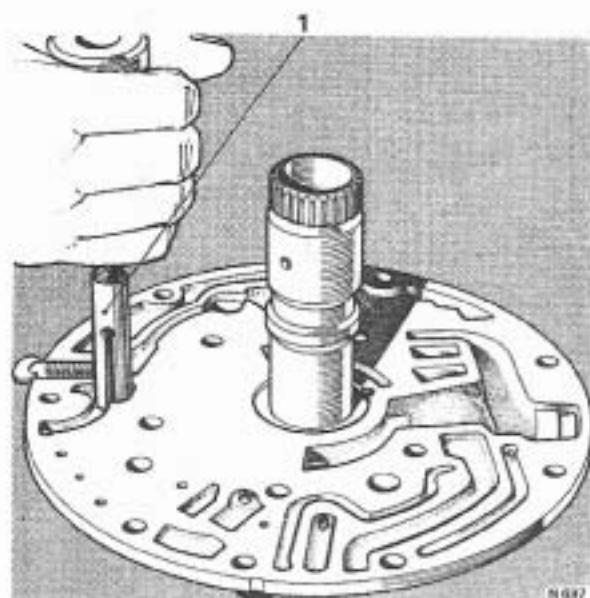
REMOVING THE BY-PASS VALVE SEAT
